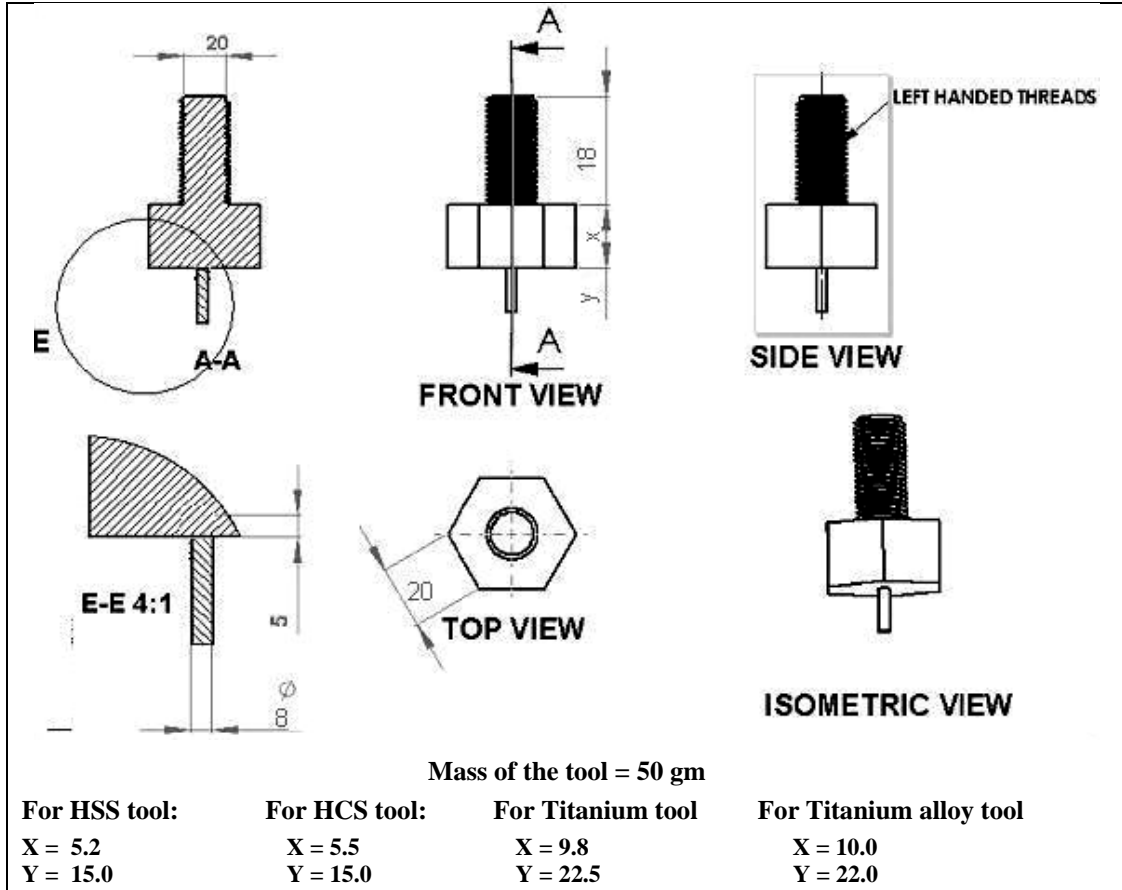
b) Tool Design (HSS, HCS, Ti, Ti alloy tools)
